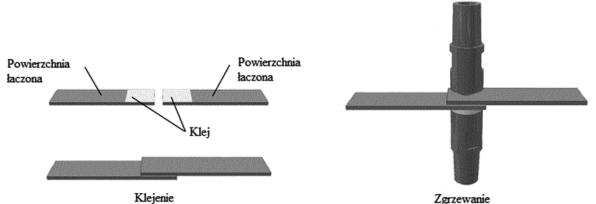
Steps of joining a hybrid weld-adhesive joint with the use of method weld-through [4]
